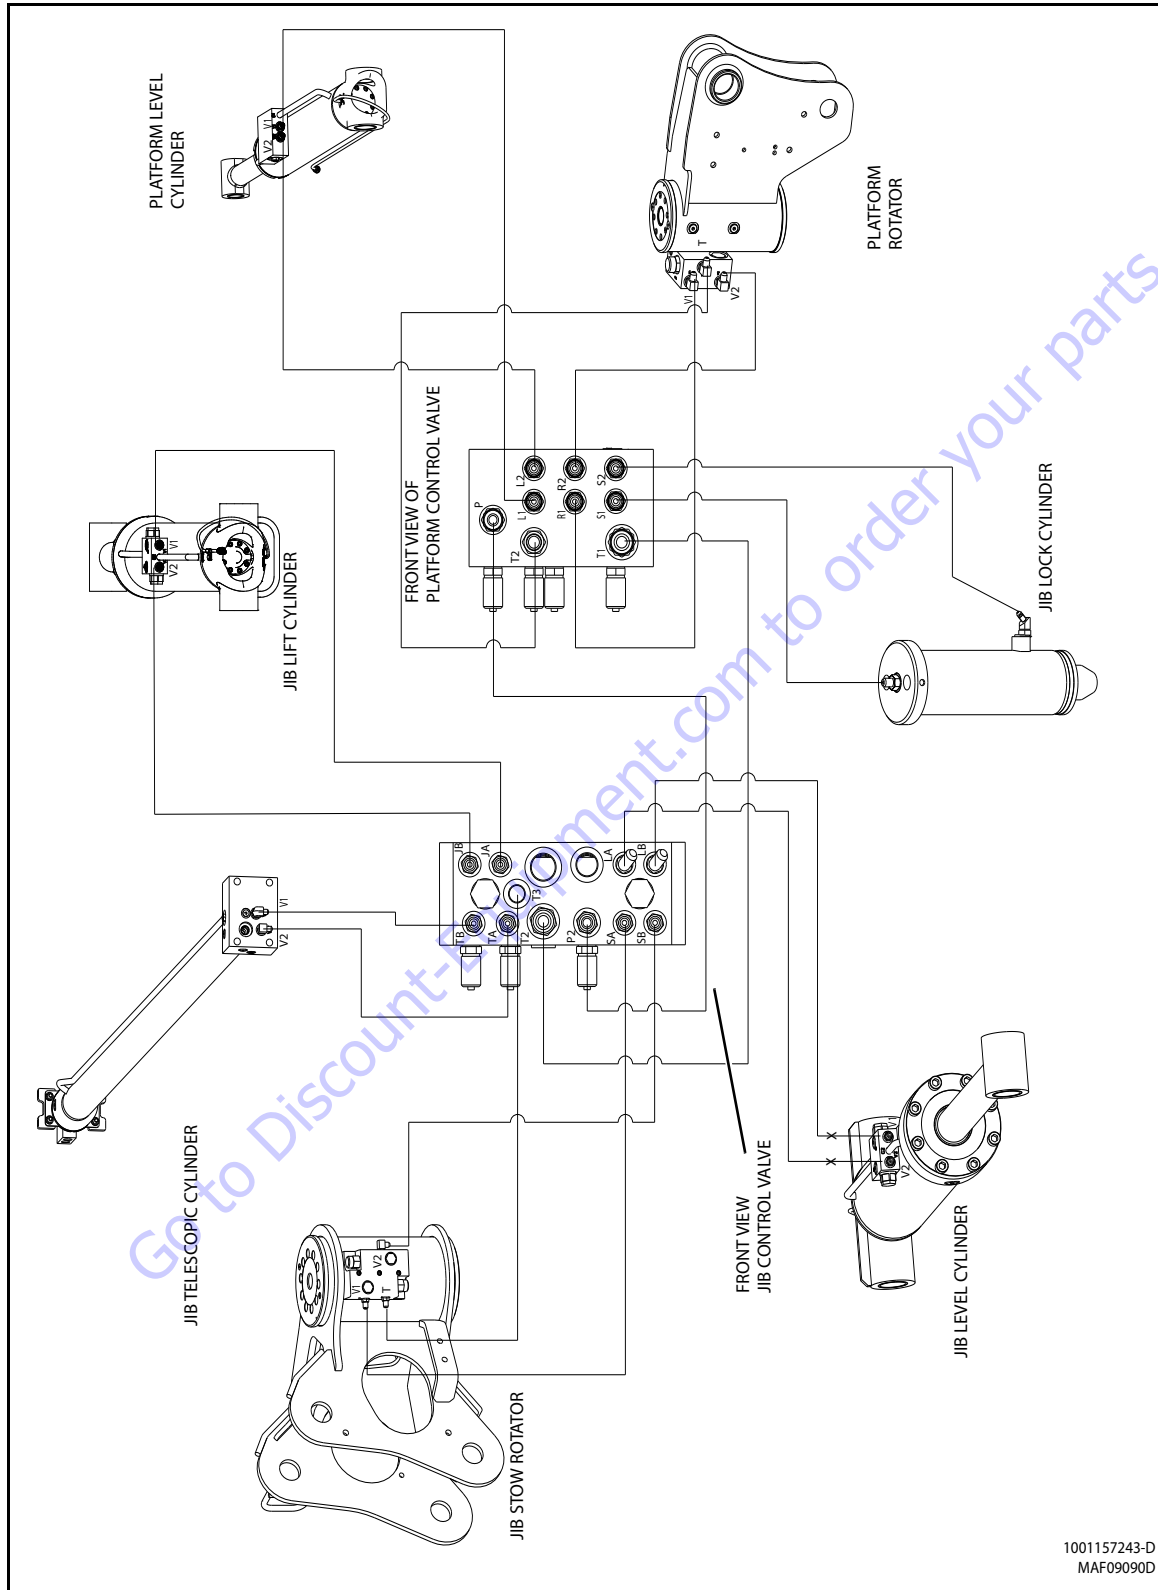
Jib Hydraulics - Sheet 2 of 7
